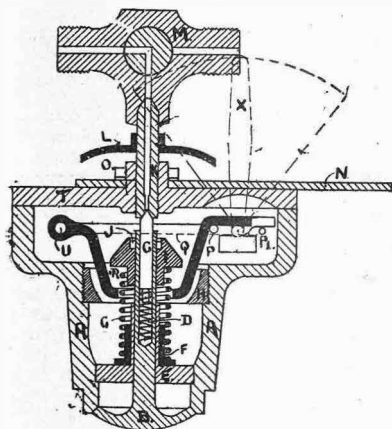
Sectional elevation of the carburetter showing general arrangement.
